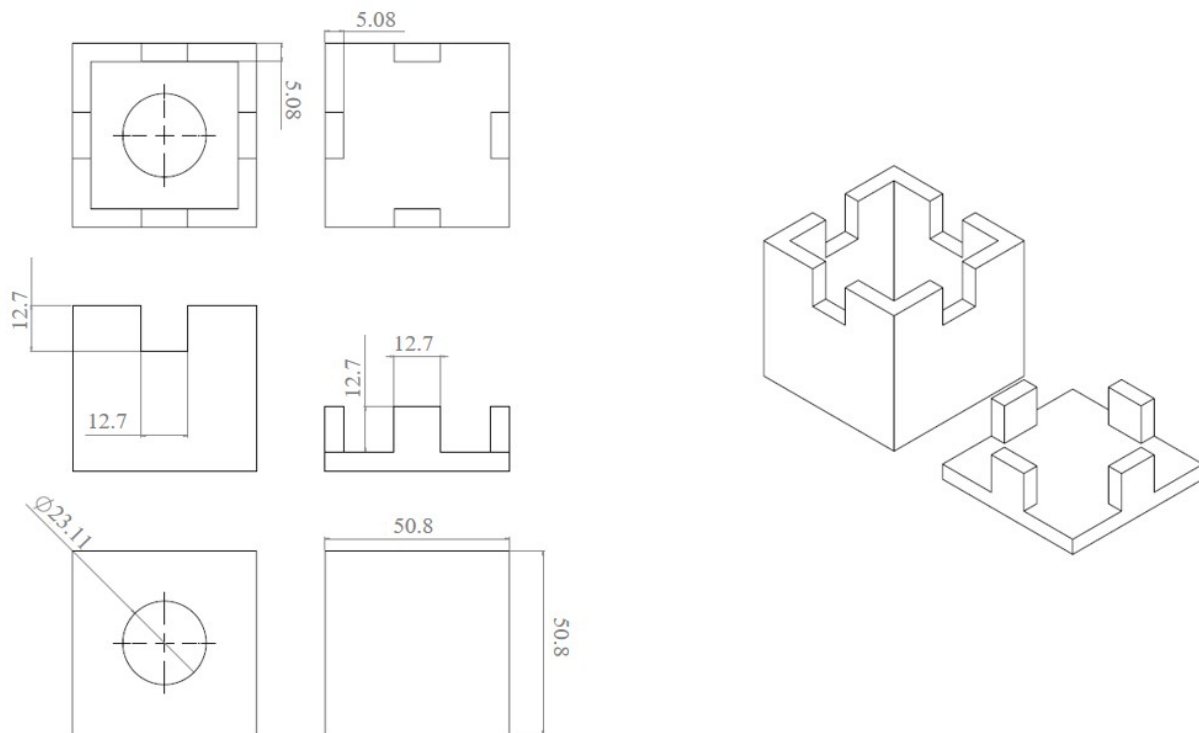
Detailed schematic of radiation box with dimensions in millimeters.
